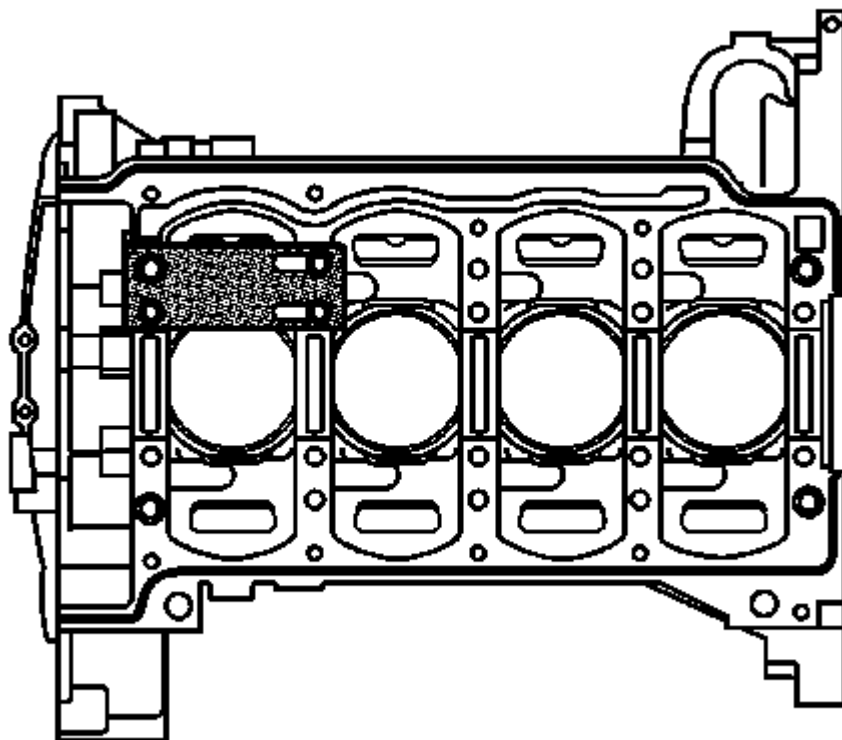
Installing Fixture Plate, Bolt, & Bushing Onto Engine Block
